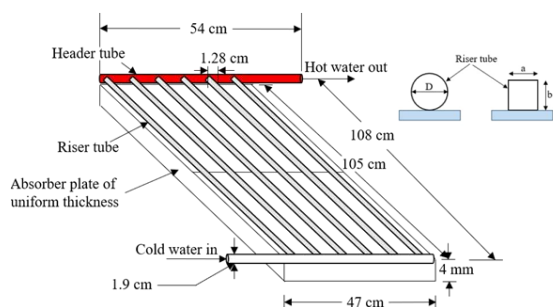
Isometric drawing of FPC's absorber plate with riser tube arrangement.
